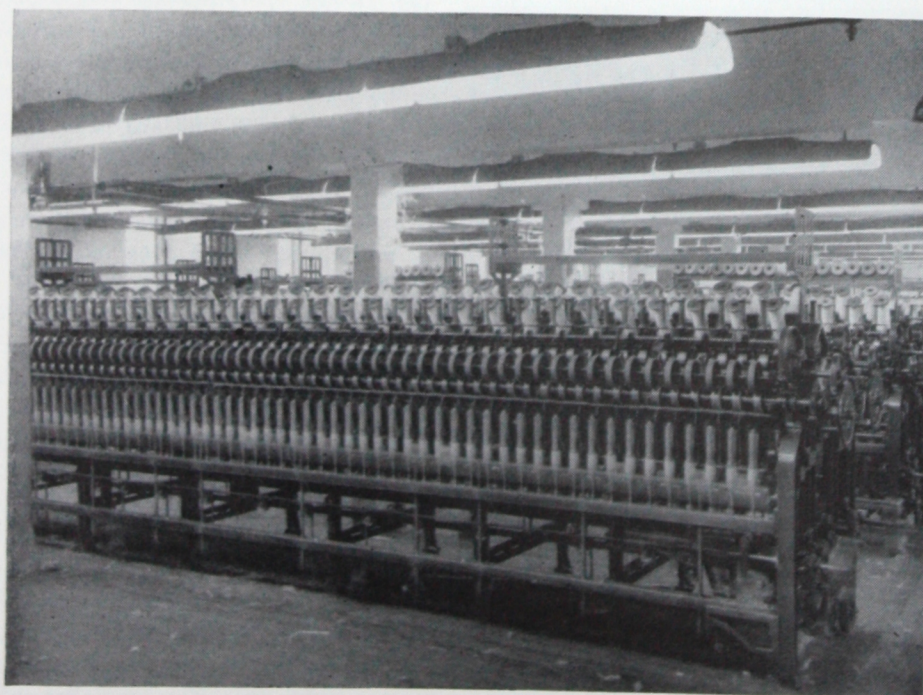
Cap spinners illuminated by open end, twin lamp reflectors mounted in continuous rows on 8-foot centers 8 feet above the floor. This installation provides 60 footcandles at the bar and 50 footcandles at the spindles.
